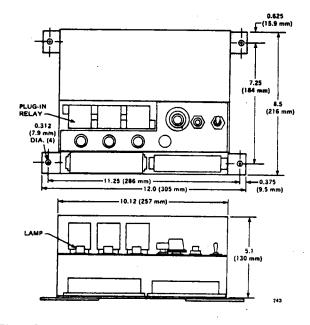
Mounting Dimensions of the Controller in Inches (mm).
